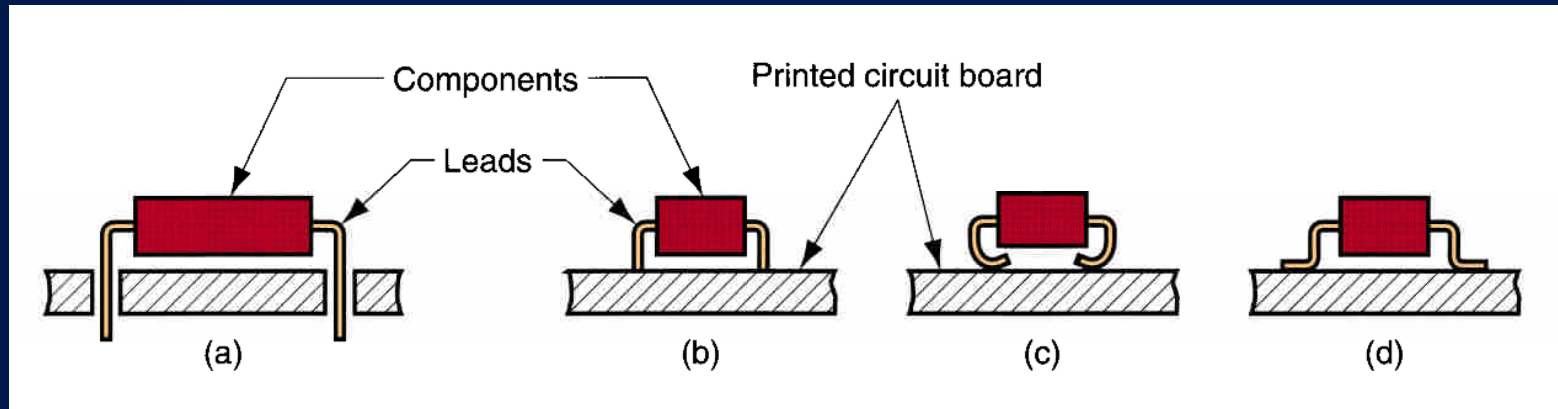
Types of component lead attachment on a printed circuit board: (a) through-hole, and several styles of surface mount technology: (b) butt lead, (c) "J" lead, and (d) gull-wing
